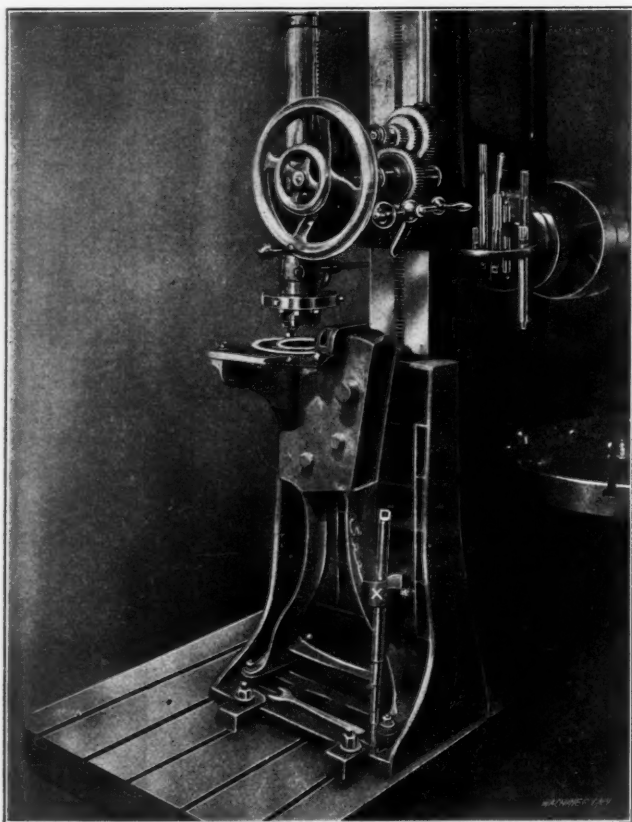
Machining the Holes and Cylindrical Surfaces about the Axis of the Bowl and Spindle
